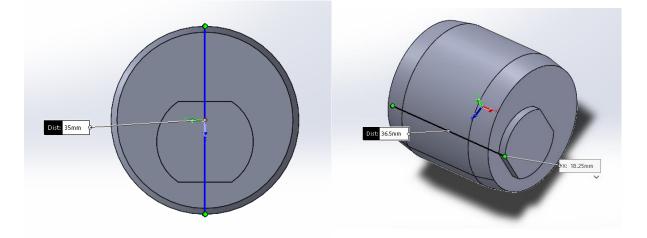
CRANKPIN JOURNAL GEOMETRY AND DIMENSIONS
